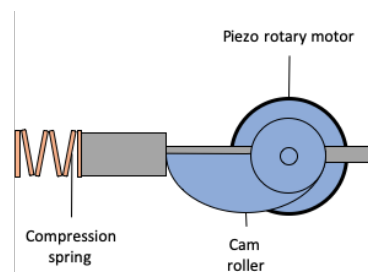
This figure shows front-view sketch of the parts enclosed by the dotted-line box in Figure 11.14
